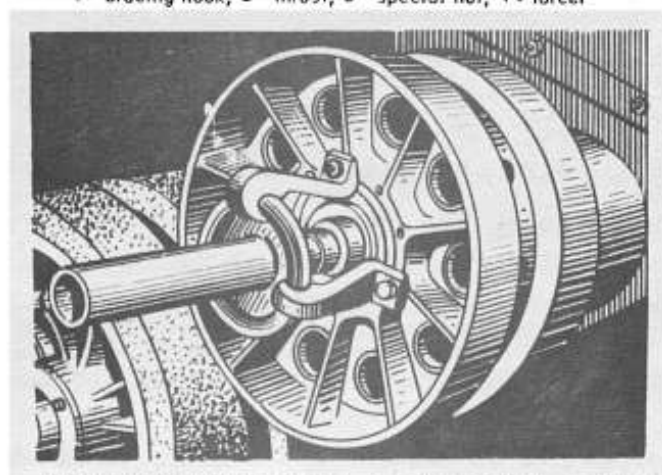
MOUNTING FIXTURE 14-1A FOR PRESSING OFF THE IDLER WHEEL (ROAD WHEEL)
